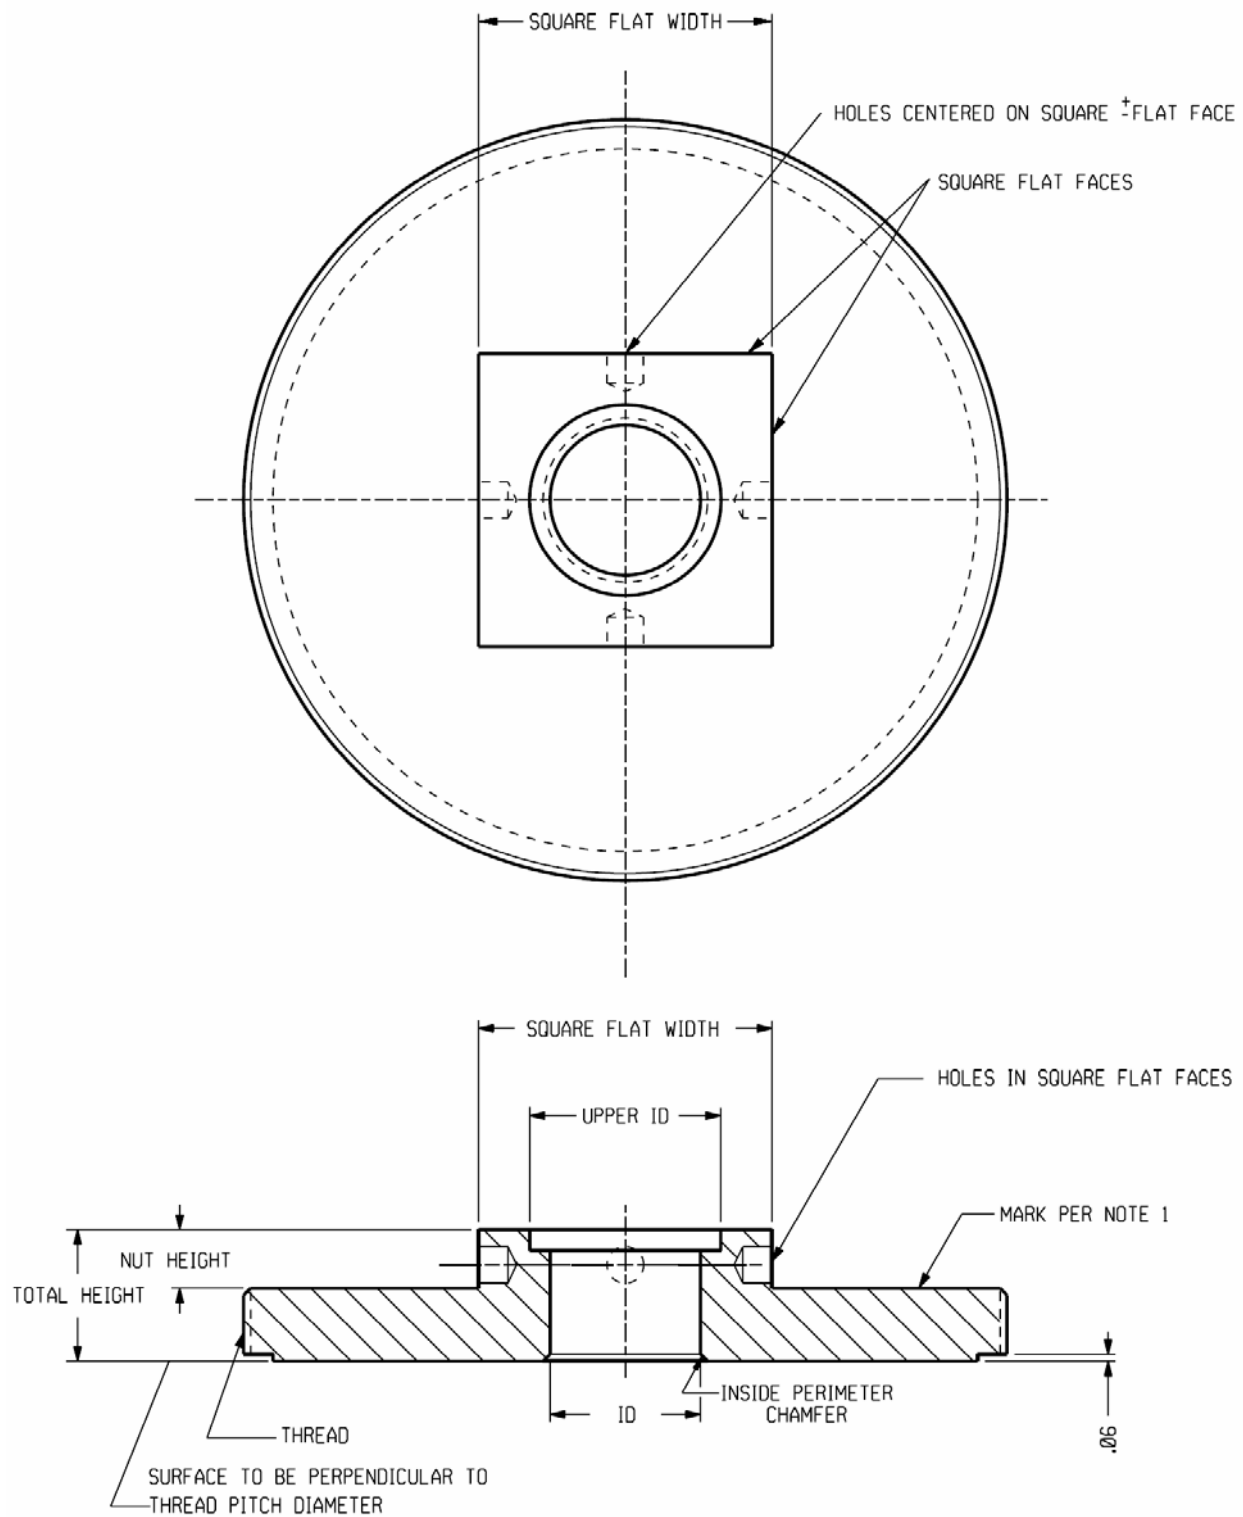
Cone Seal Nut Inspection Diagram
